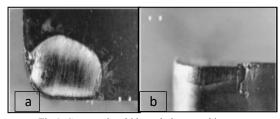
Cemented carbide tool photographic: a-crater wear, b-flank wear [7].
